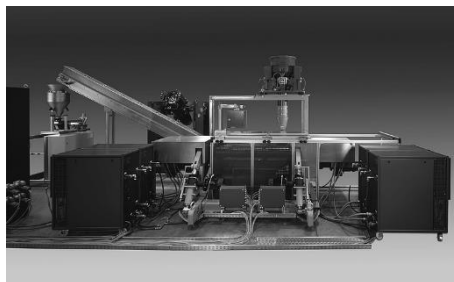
Shear roll mixer for metal injection moulding (Courtesy Bellaform GmbH)
